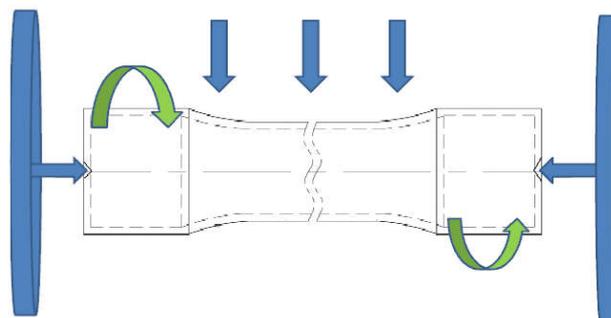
To straighten the torsion bar, we will put the load from top and keep checking straightening, by dial gauge, revolving the torsion.
